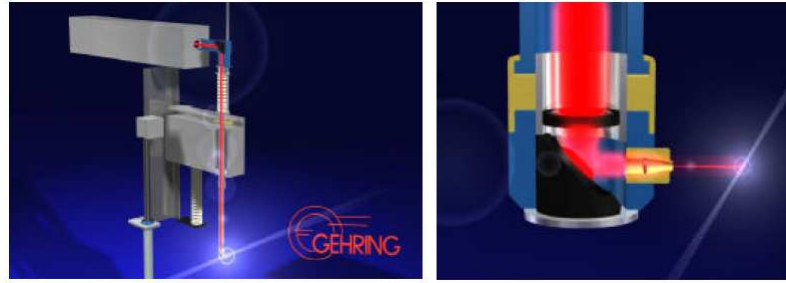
Beam Guiding in a Laser Machining Plant and in a Laser Head System
